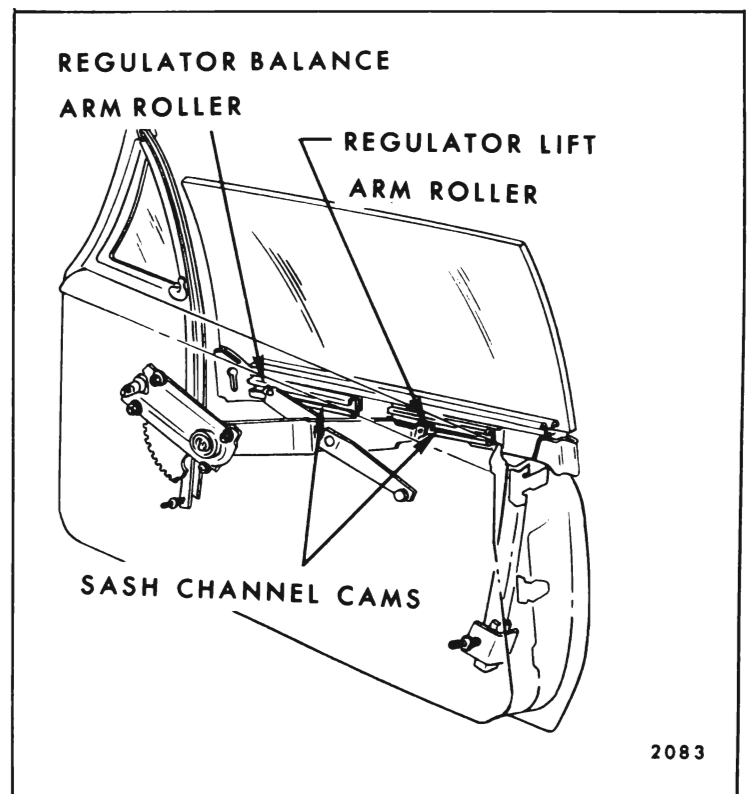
Front Door Window Installation - Buick, Oldsmobile, Pontiac "A-17 and 67" Styles
